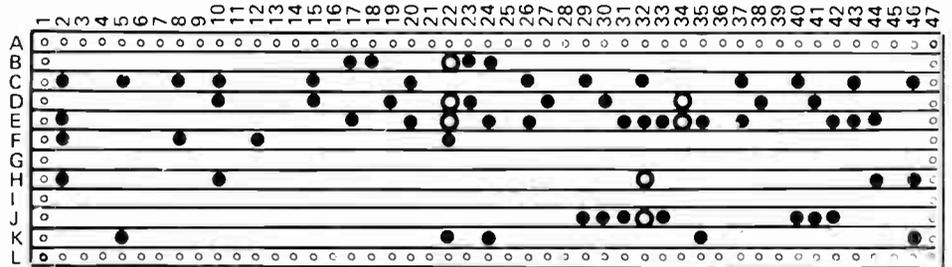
The underside of the Veroboard showing the breaks in the tracks (circles) and the solder joints (dots).
